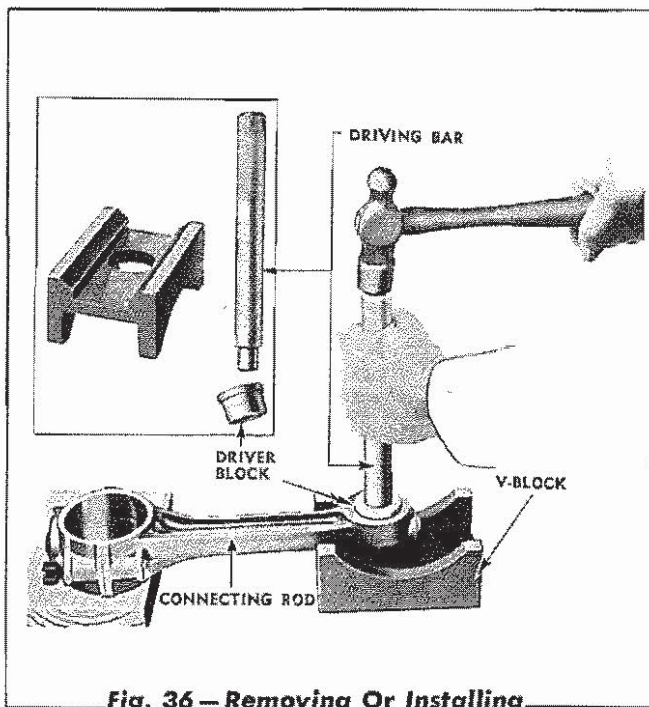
Removing Or Installing Connecting Rod Bushings
